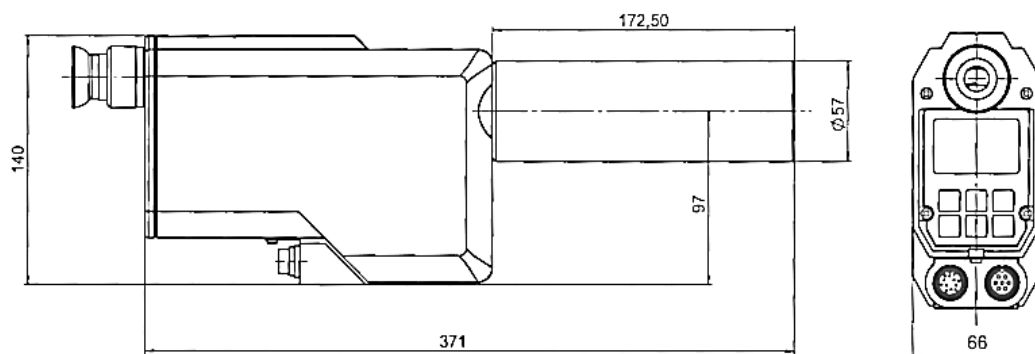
Dimensions of the TRT II, with all dimensions in millimetres [98].
